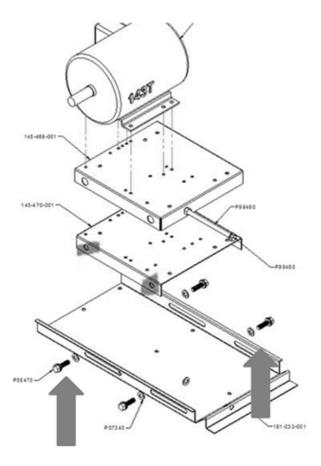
Remove the Belt Tensioner Bolts Completely
